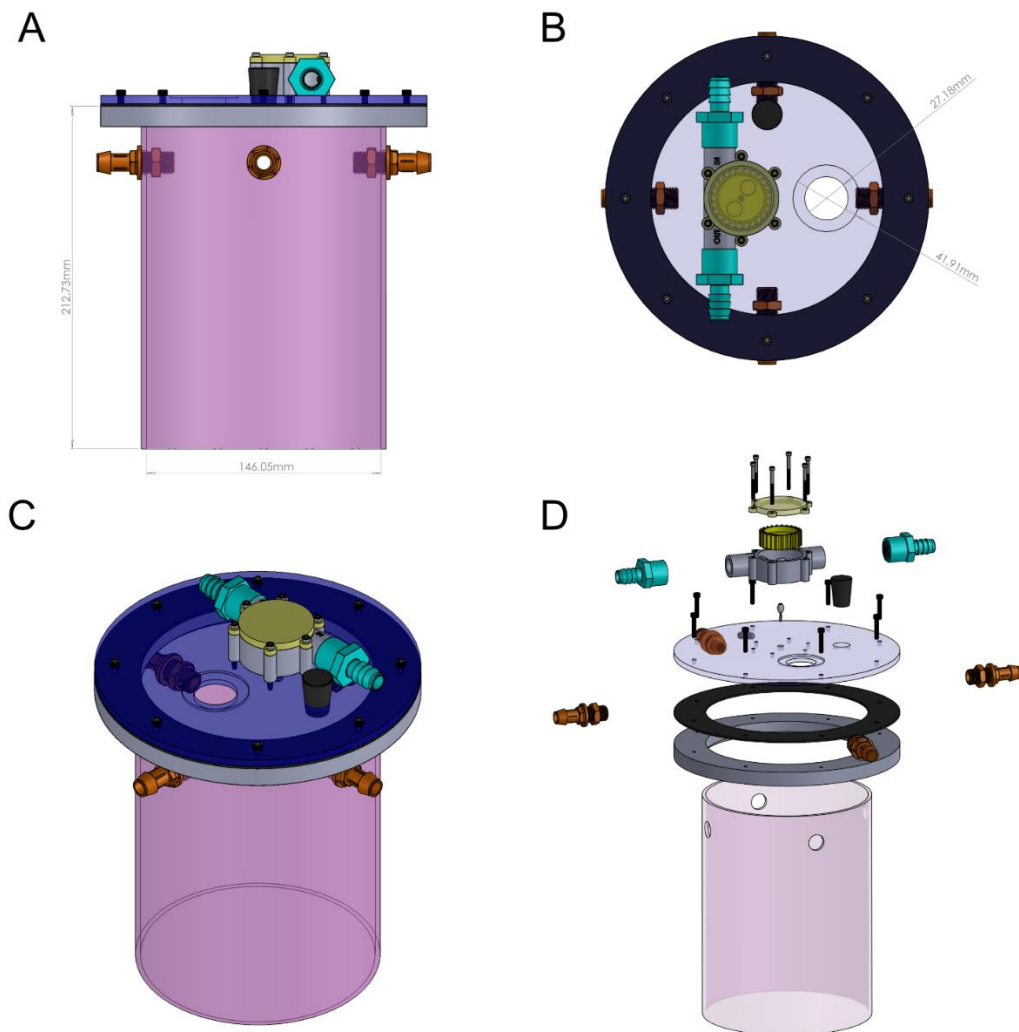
Detailed drawings of the chamber assembly with views from A) side, B) top, C) isometric, and D) exploded into components.
